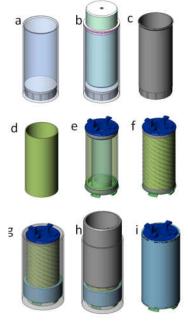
Fabrication of the twisting module. (a) Liquid silicone rubber poured into the outer mould. (b) Inner mould inserting. (c) Moulds removed. (d) Extra part cut. (e) Assembly of the twisting module. (f) Copper wire attached and leaded out. (g) Liquid silicone rubber poured into the finishing mould. (h) Inner finishing mould inserting. (i) remove the moulds
